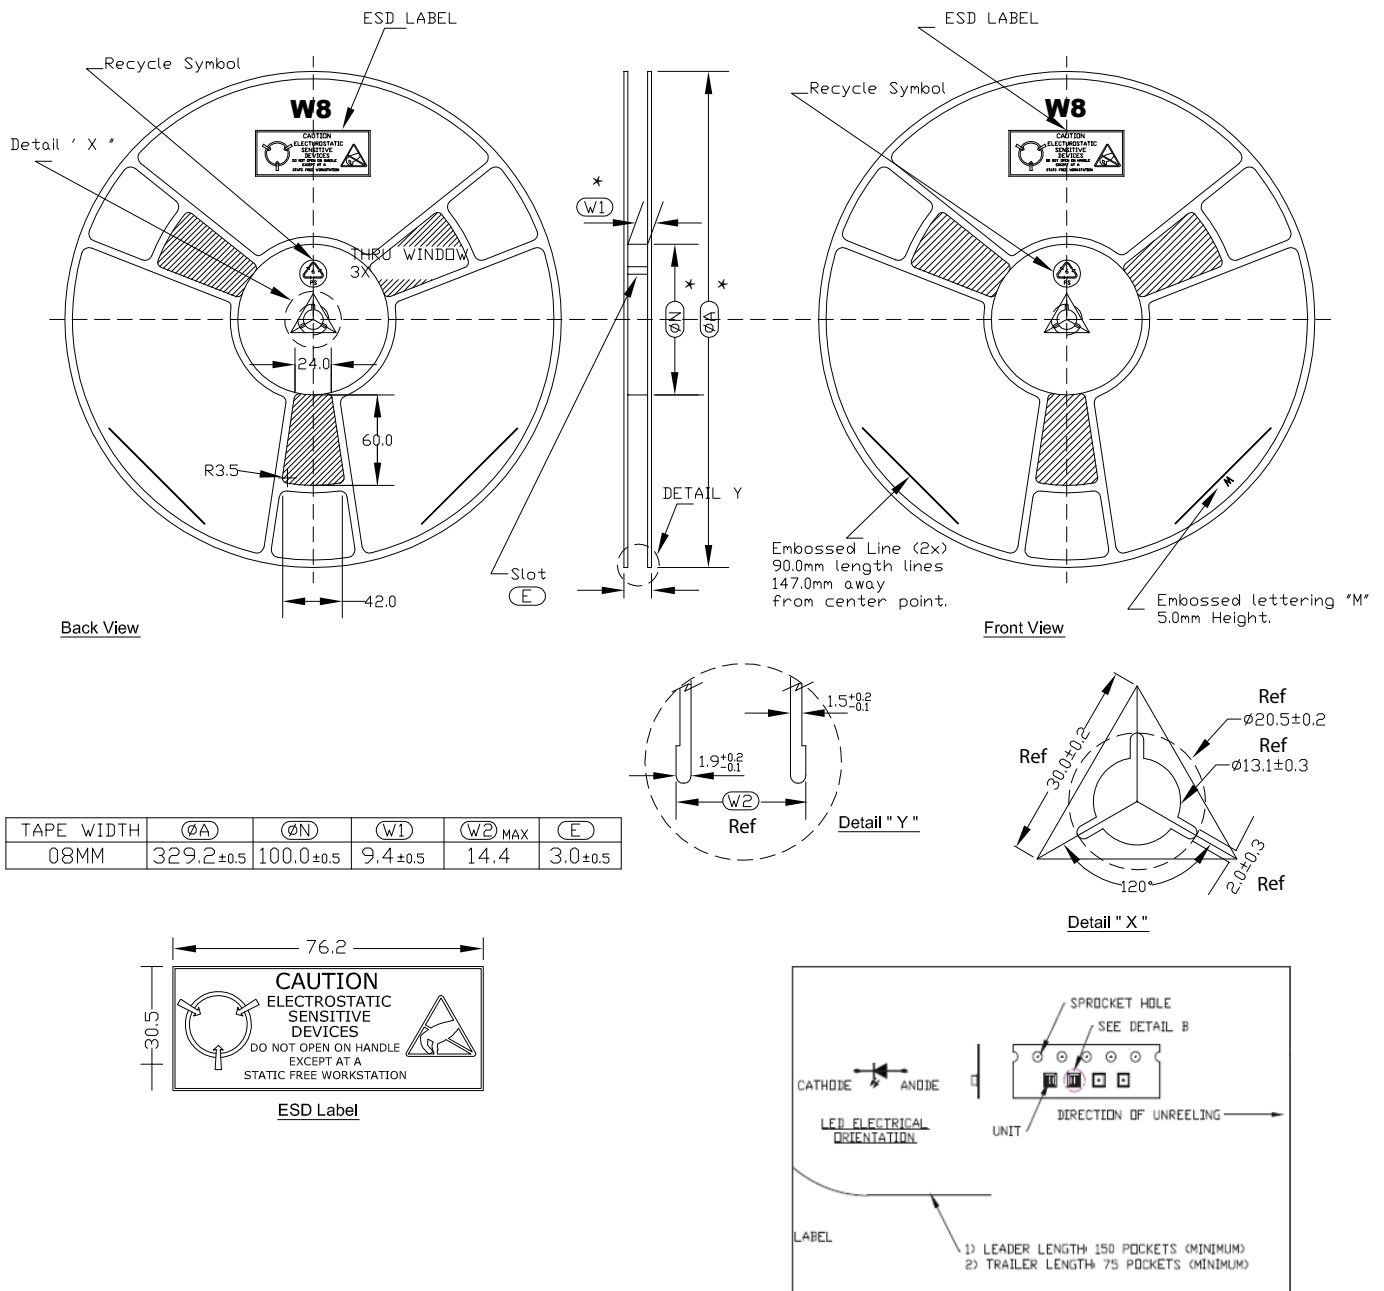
Reel dimensions for LUXEON CZ Color Line.
